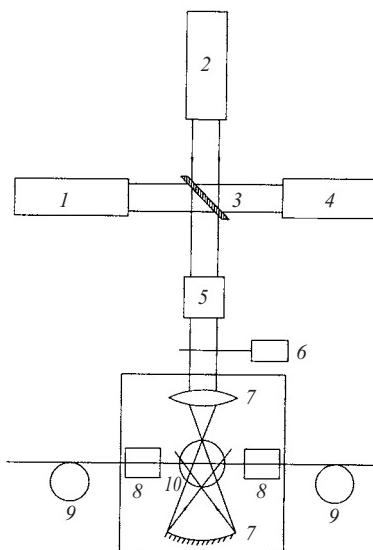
Scheme of a set for welding quartz light guides based on CO and CO₂ lasers.
